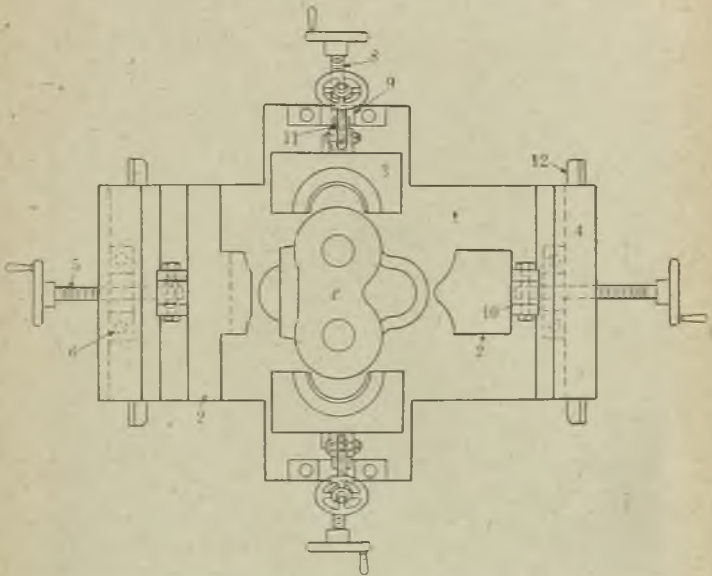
PLAN OF PERMANENT MOULD, THROWN OPEN; *cf.* FIG. 8 (Székely).
